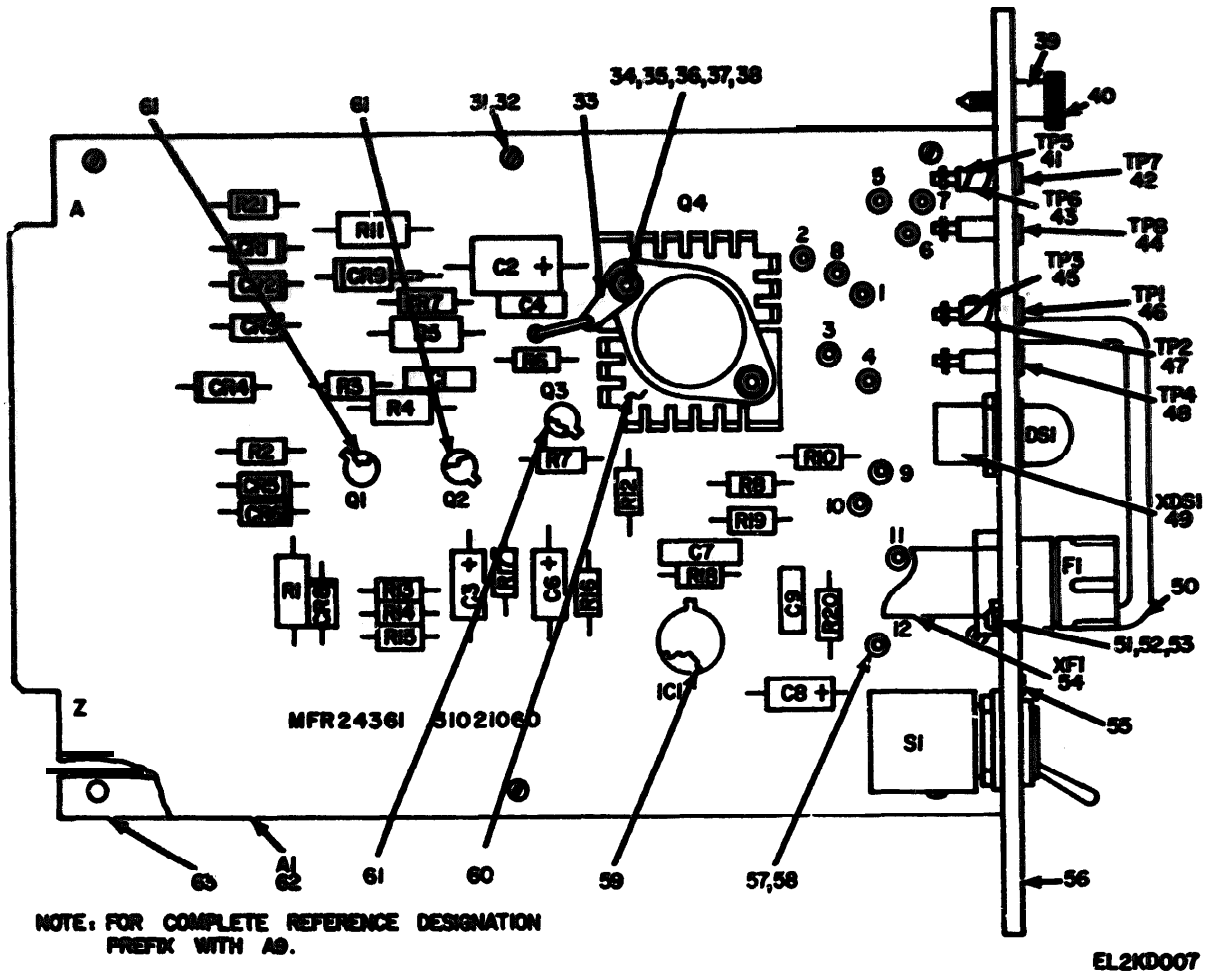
Power Supply Assembly (A9) (Sheet 1 of 2)
